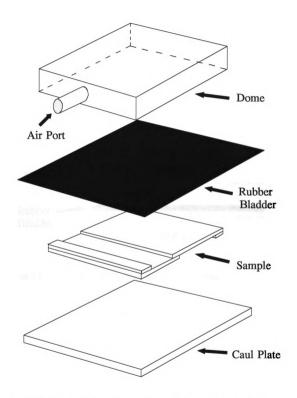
Exploded view of the assembly used to cure the lap-shear panels.
